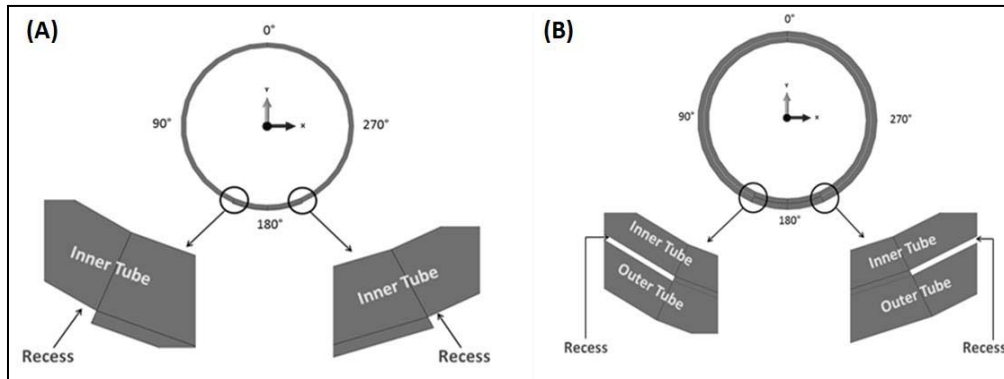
Numerical model assembly showing: (a) The inner tube alone with the recess and (b) The inner tube after the addition of the outer tube.
